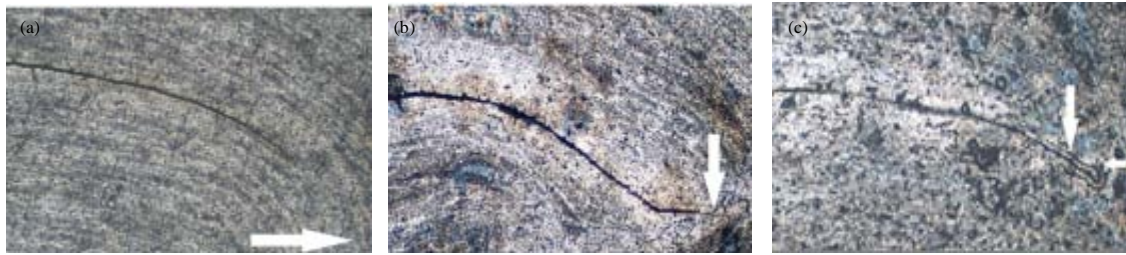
(a-c): Changing in hooking shape and direction, (a) 40 mm min<sup>-1</sup> welding speed (hooking tip is moving down), (b) 50 mm min<sup>-1</sup> welding speed (tip is almost parallel to interface) and (c) 60 mm min<sup>-1</sup> welding speed (tip is folding up) (all images are in 150X)
